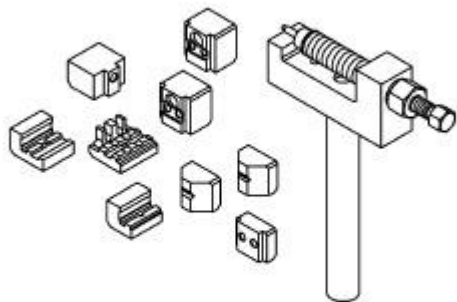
REMOVER/INSTALLER, CHAIN LINK - 9312A
